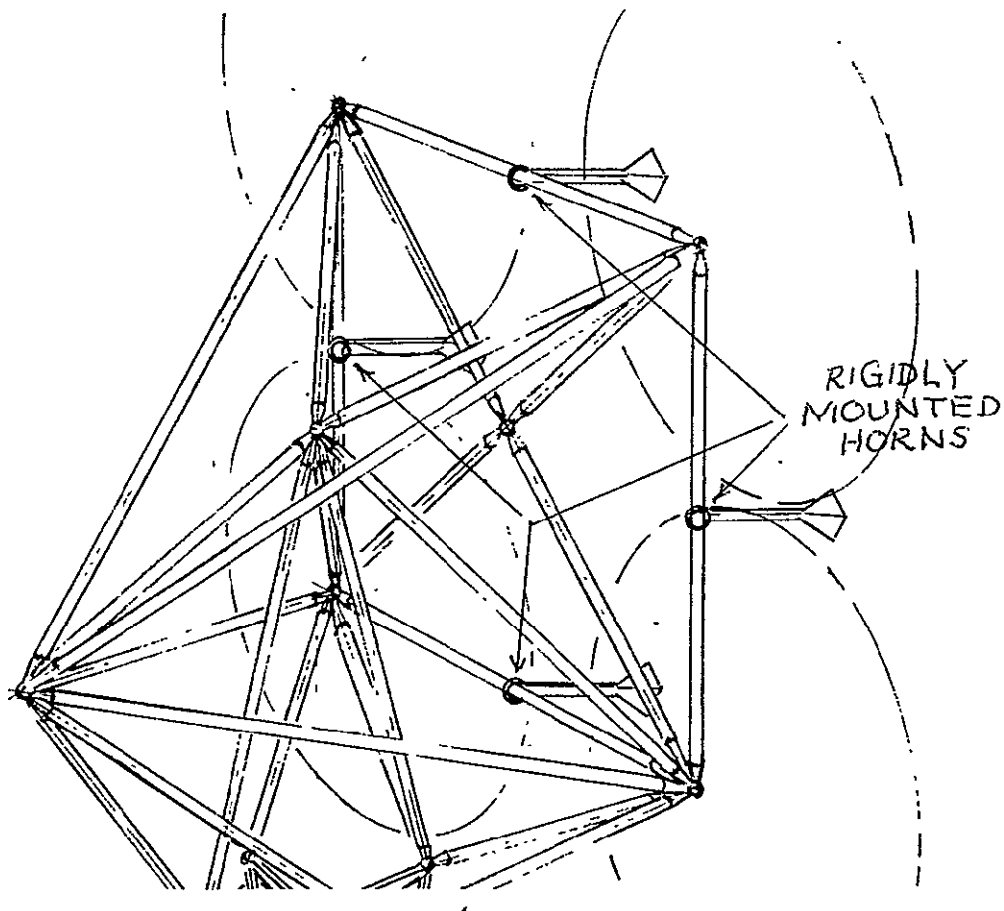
HORN MOUNTING, ISOMETRIC VIEW
